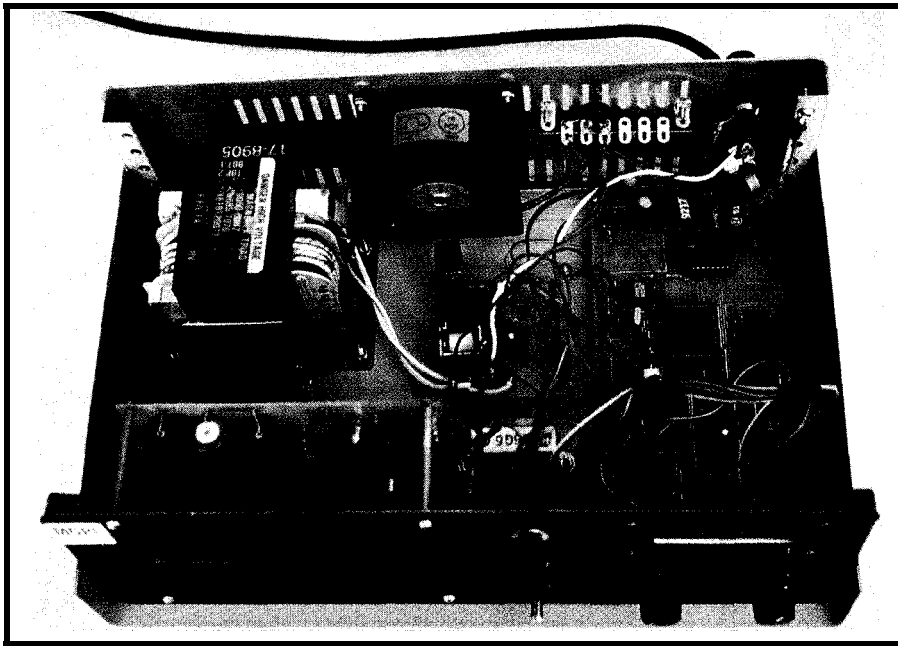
In an overhead view of the power supply, the microcontroller PCB is to the extreme right, the primary control PCB is in the middle near the fan, and the HV section is to the left.
